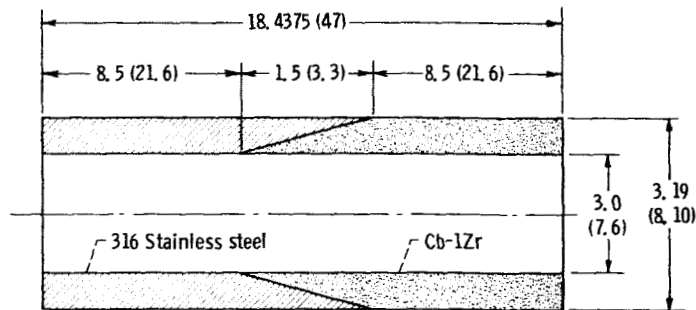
Cross-sectional view of Cb-1Zr-to-316-stainless-steel joint. (Dimensions are in inches (cm).)
